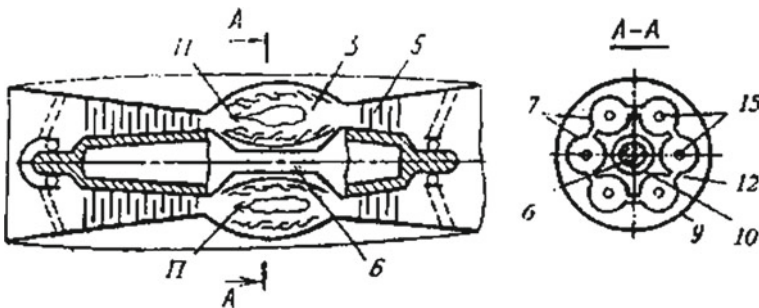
Design of the cannular combustion chamber. 3—combustion chamber; 5—turbine; 6—shaft connecting the compressor rotor to the turbine rotor; 7—flame tubes; 9—outer casing of the combustion chamber; 10—inner casing of the combustion chamber; 12—cross-fire tubes; 15—fuel injectors
